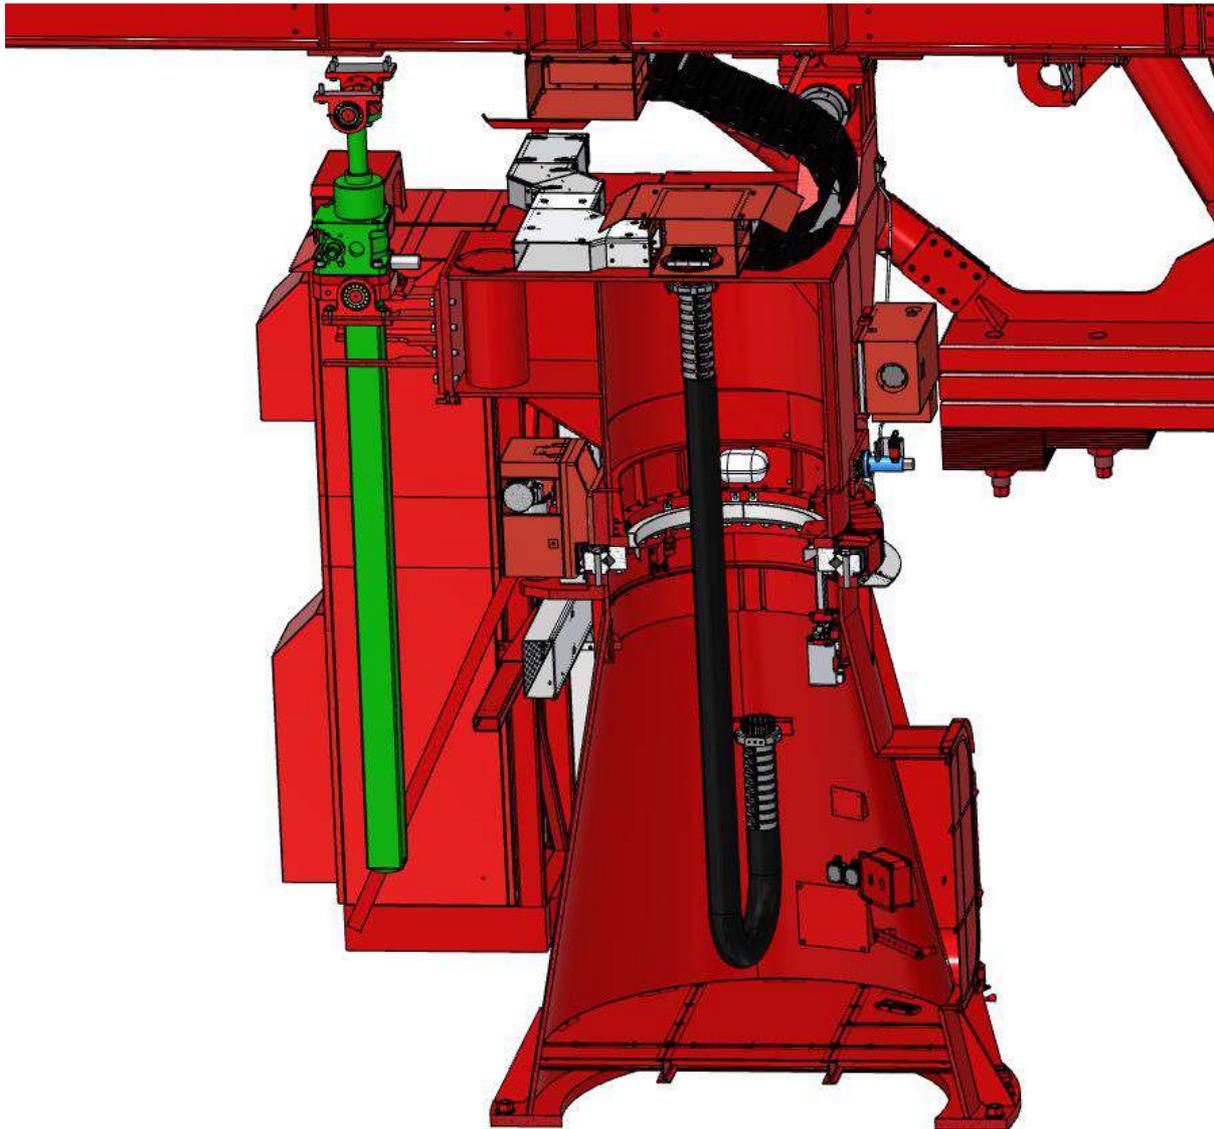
Cross-section of Telescope tower, with the Azimuth cable drape shown.
